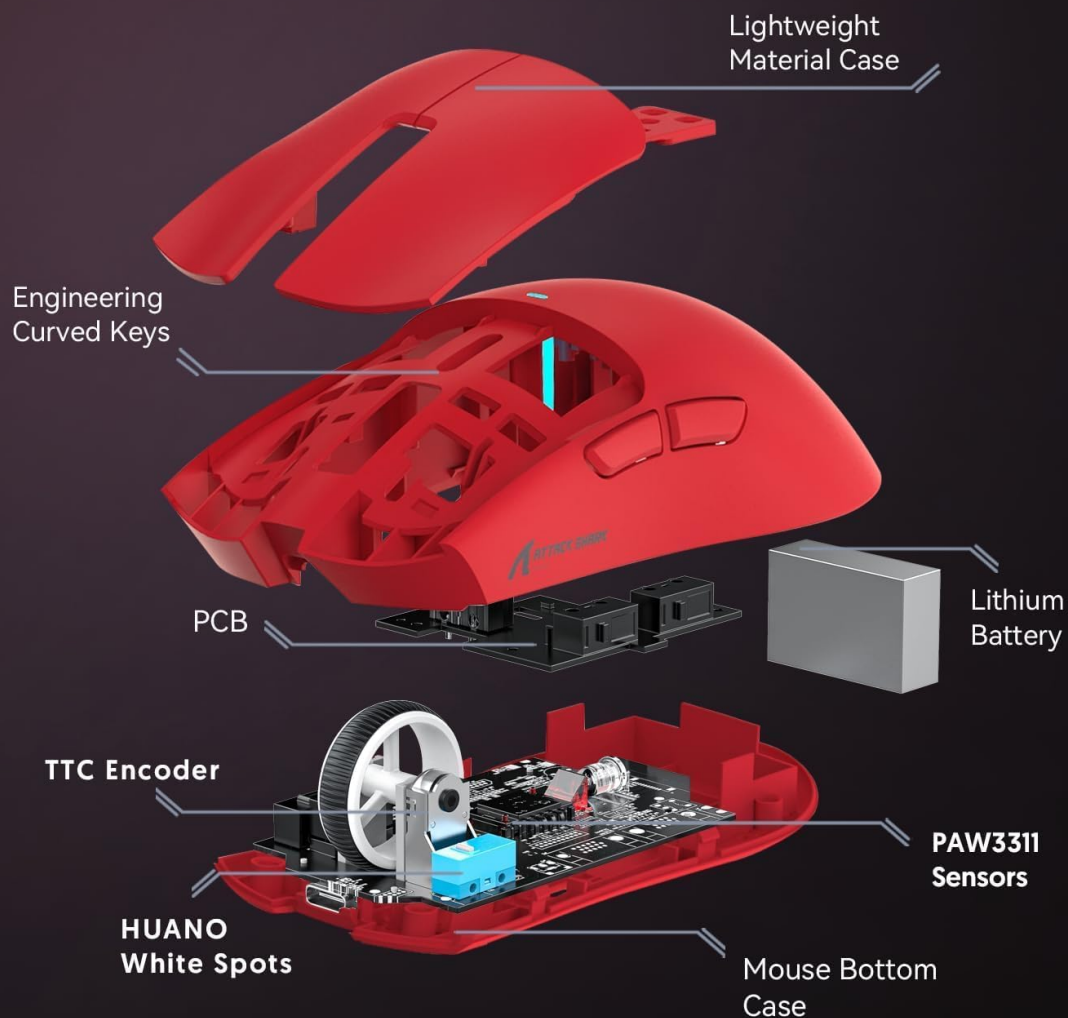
Exploded diagram showing internal components like the lightweight material case, engineering curved keys, PCB, lithium battery, TTC encoder, Huano switches, PAW3311 sensor, and mouse bottom case.
